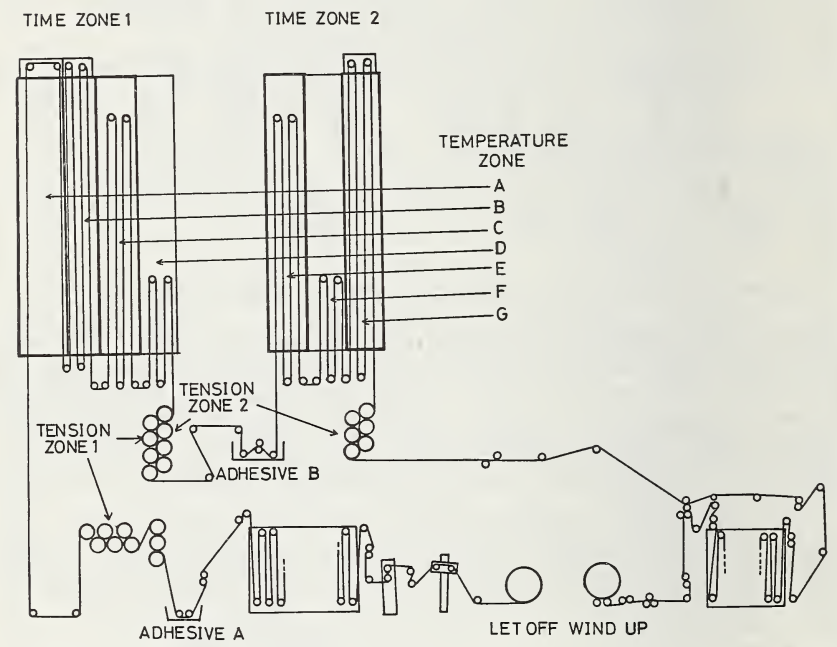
Schematic drawing of Goodyear continuous double dip equipment.
